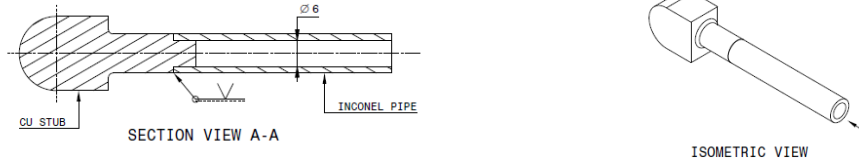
Inconel pipe welded with Cu stub(00-04)
